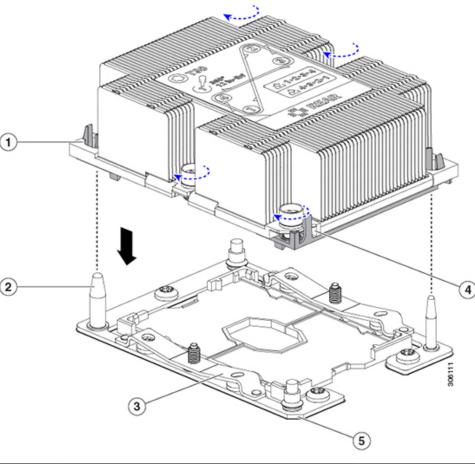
Installing the Heatsink/CPU Assembly to the CPU Socket
